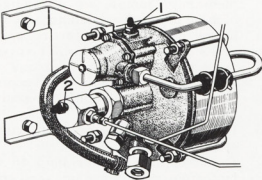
Brake Booster Air Bleeder Plugs G0413
